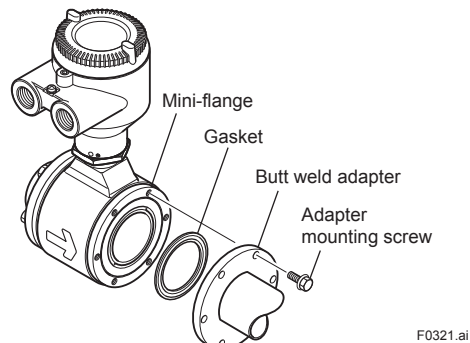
Mounting Procedure for Weld Joint Adapter Type
